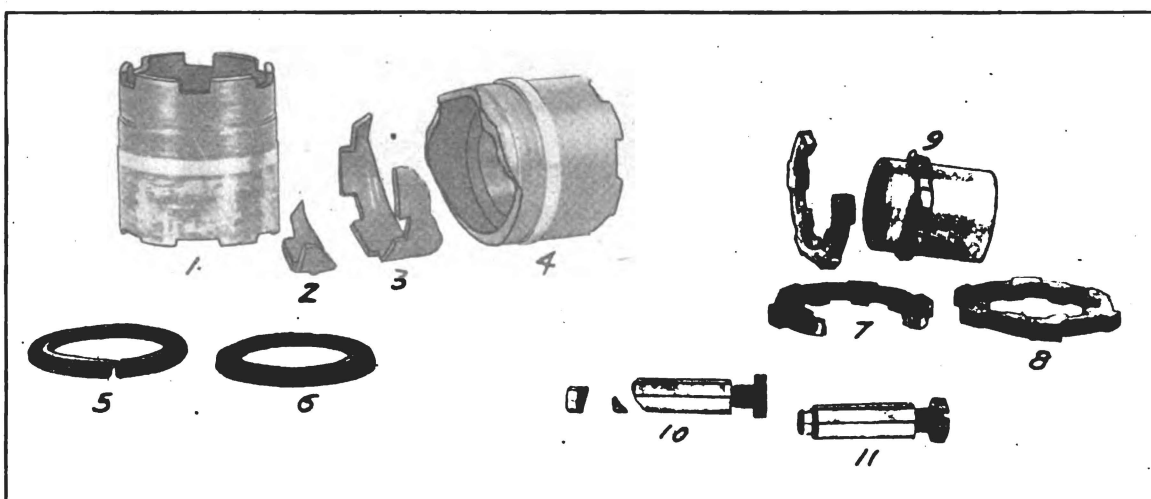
Bijur (rear end) starter, showing failure of several parts.
